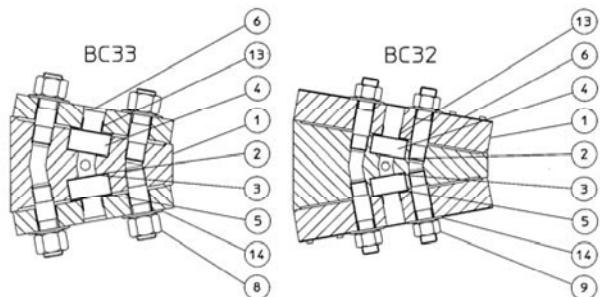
BC33 e BC32 typical assembl Dwg.
